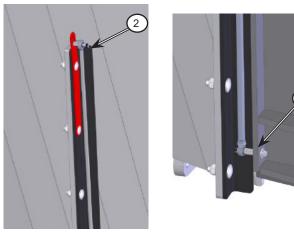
Attachment of the door sensor to the tub and unload door (Front unload door shown)
